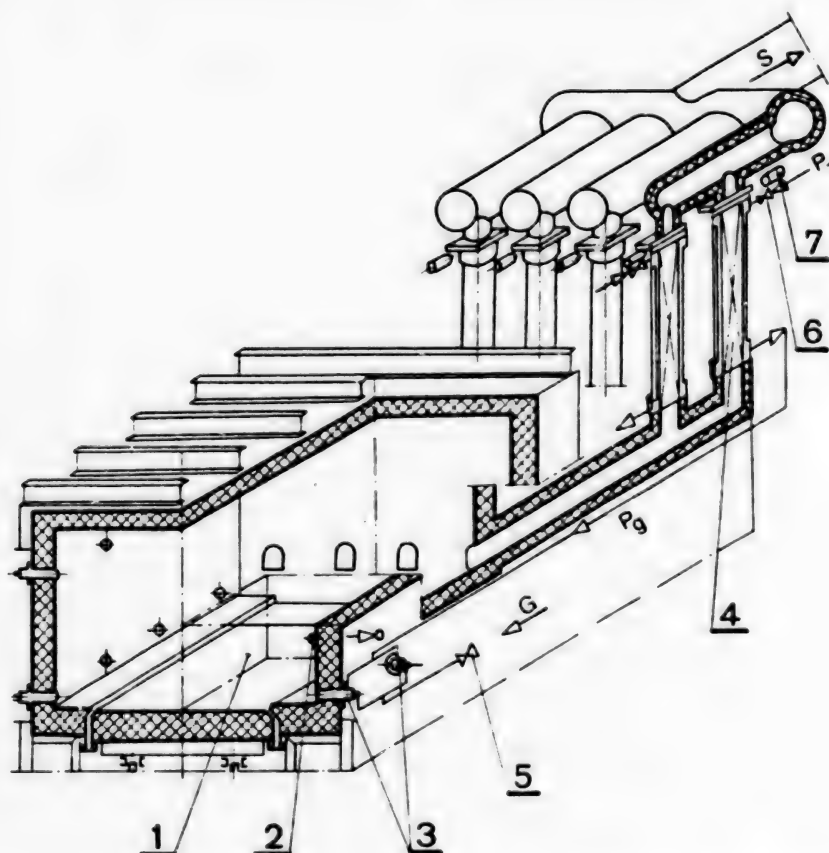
Car bottom furnace for the heating and heat treatment operations carried out in forge and press shops: 1 - heating assembly, 2 - thermoelements, 3 - burners, 4 - recuperators, 5 - gas stream electrically operated valves, 6 - air stream electrically operated valves, 7 - equipment for the automatic switching on or cutting off the flow of flue gases through the recuperator.
